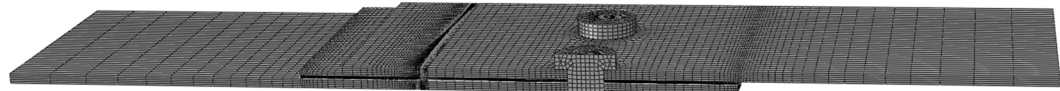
Schematic of 'Hybrid B' with the first row of rivets and fastener holes removed
